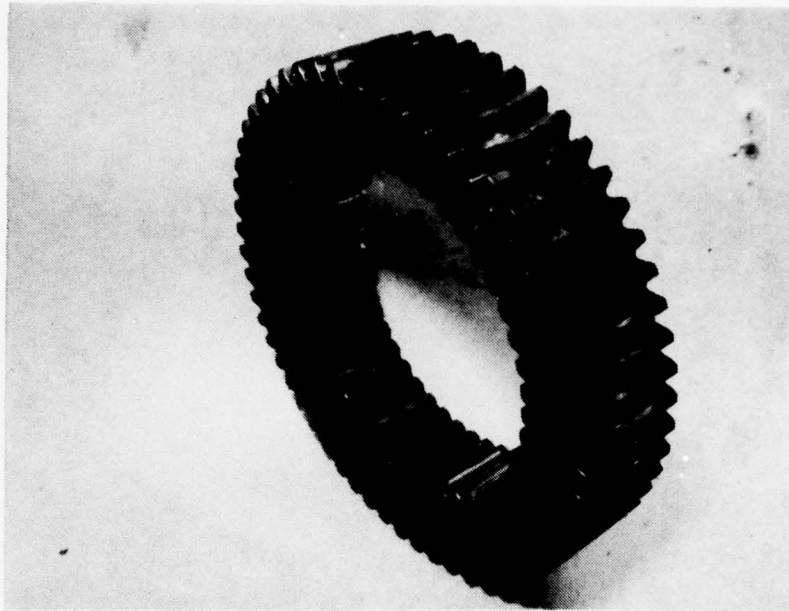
Nitrided lower sun gear after fourth loss-of-lube test.
